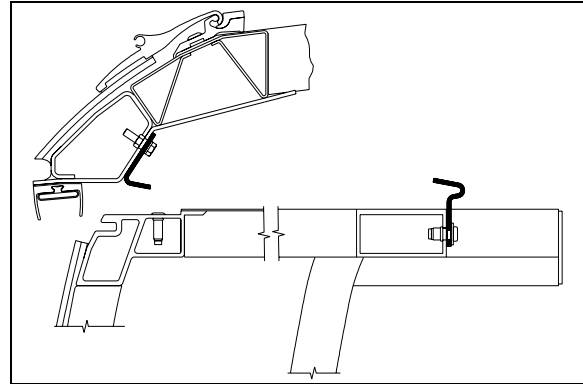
SLIDE-OUT 2" INSIDE – UPPER PART
